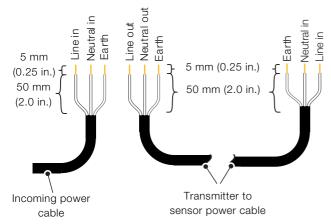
Incoming mains power cable and transmitter to sensor power cable preparation
